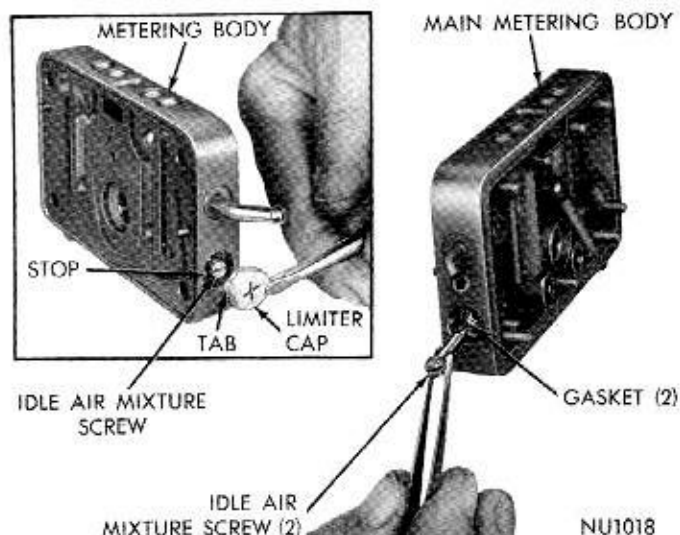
Installing Idle Air Mixture Screws and Gaskets
